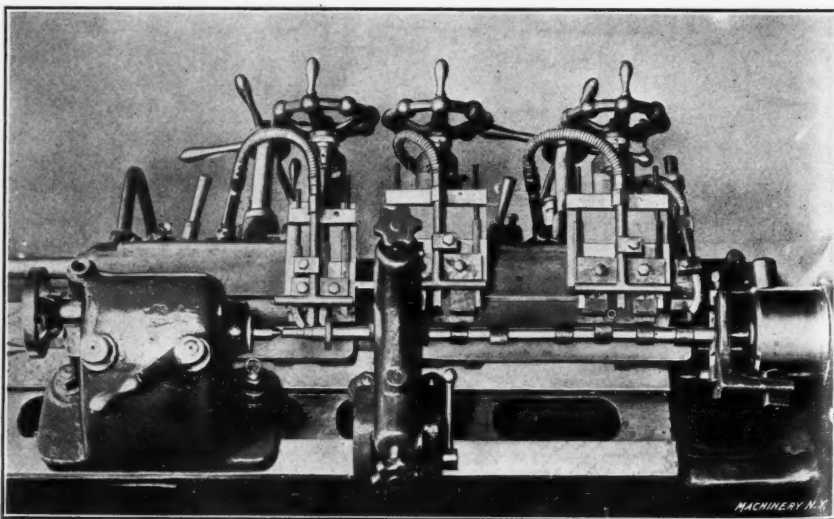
Arrangement of Tools for the Second Operation on the Camshafts
